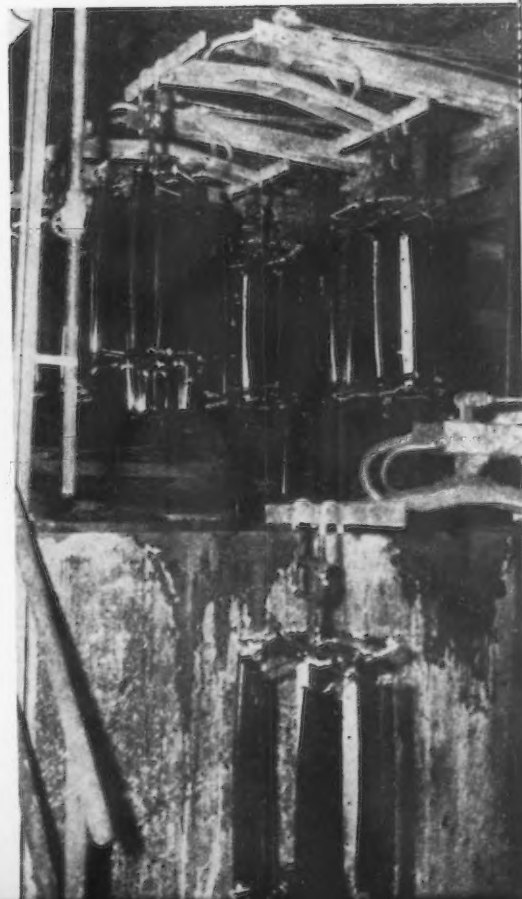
Racks of bumper guards emerging from the drying oven at the end of the plating line.
